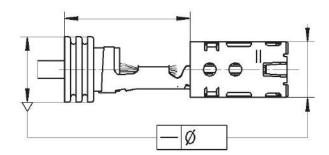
Position of the single-wire seal in the crimp pattern of the standard part drawing
